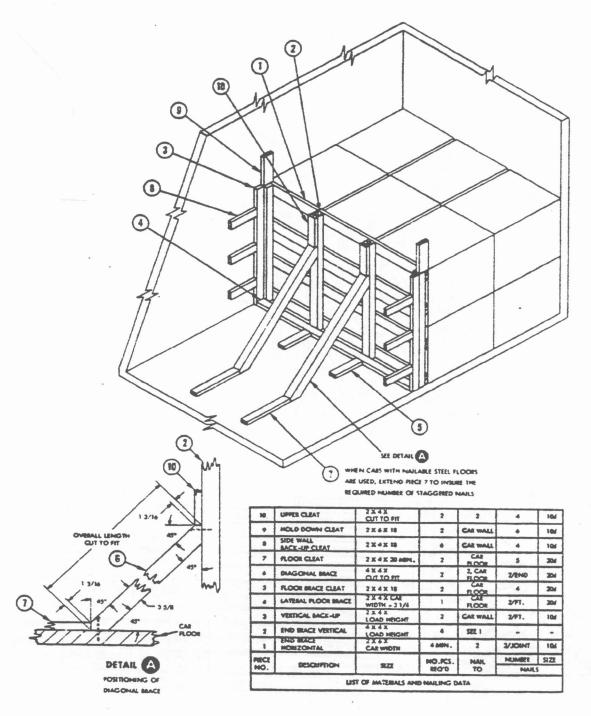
END BRACING FOR LESS THAN CARLOAD SHIPMENTS UP TO 5,000 POUNDS
